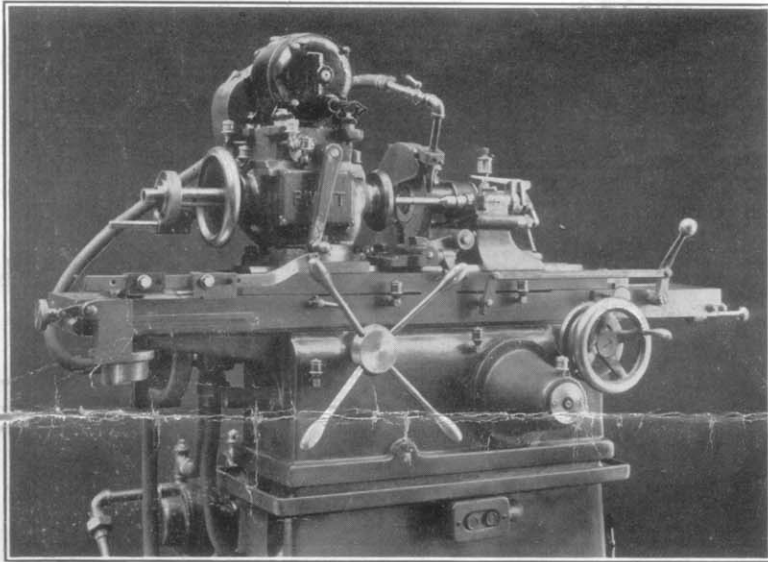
104-Grinder with External Grinding Attachment, Spring Lever Tailstock and Tip-over Diamond Holder, set for grinding work, between centers, with standard Screw Draw-in Spindle
